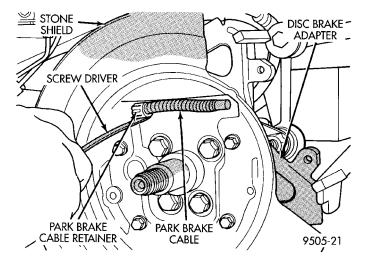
Park Brake Cable Removal From Disc Brake Adapter
